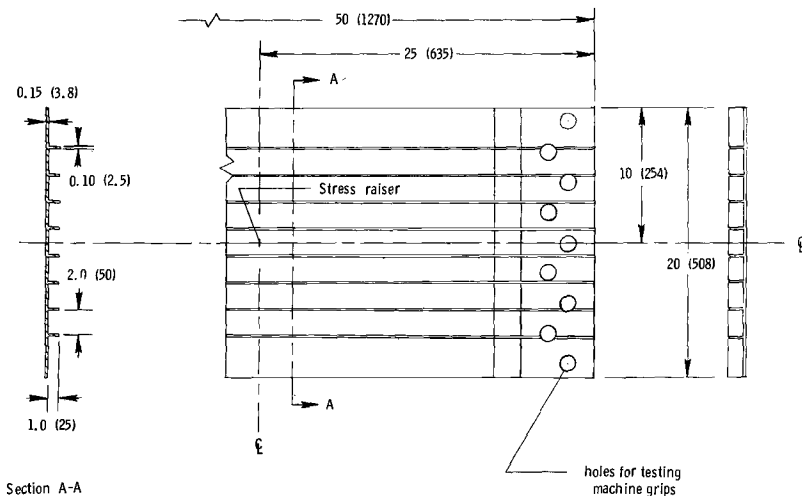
Panels with integral stringers. Dimensions are in inches (millimeters).
